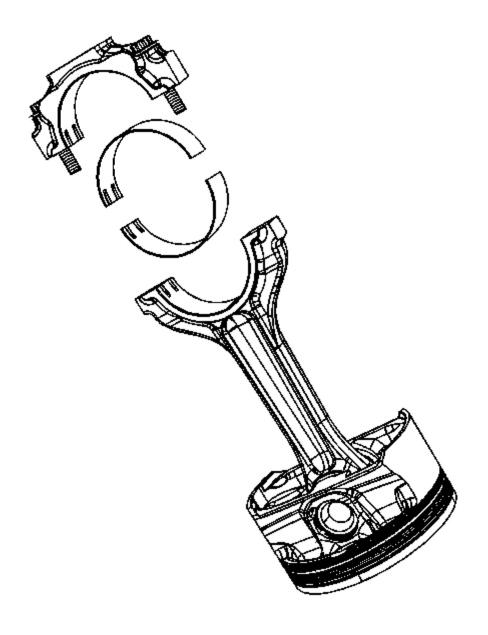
View Of Piston, Connecting Rod & Bearing Assembly Courtesy of GENERAL MOTORS CORP.
